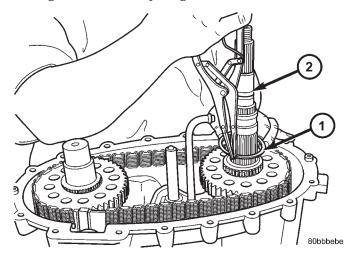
Remove Output Shaft Drive Gear Snap-ring
